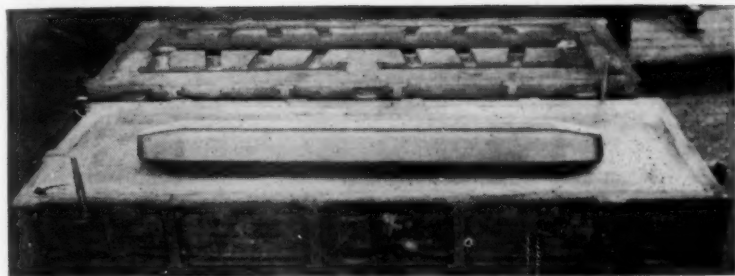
DRY SAND MOLD WITH OIL SAND DRAG FOR CHROMIUM CAST IRON INGOT MOLDS.
